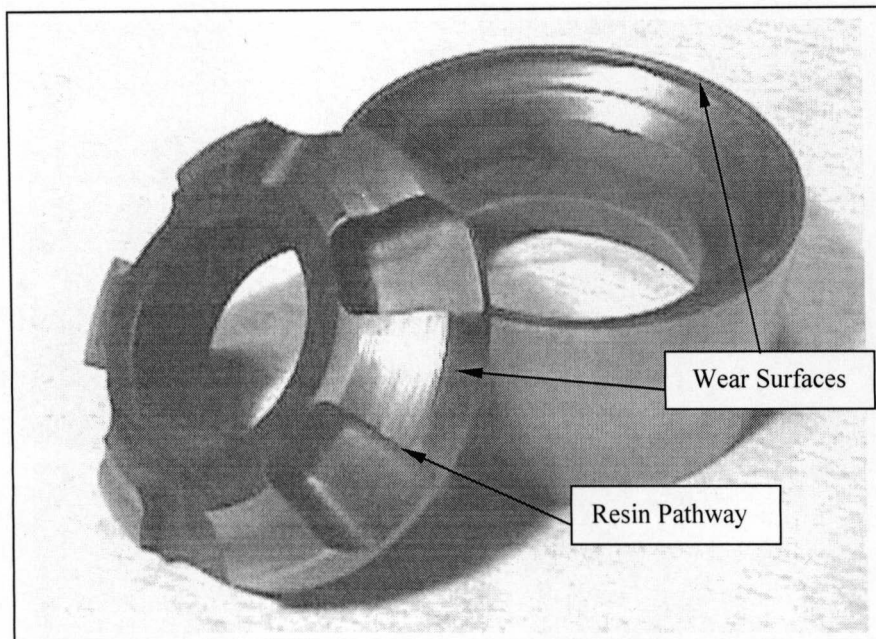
Wear on Mating Surfaces of Front Seat and Ring.
